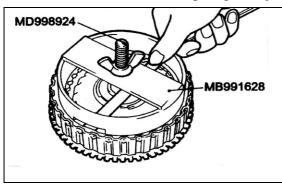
A-138 Standard value: 1.25-1.45mm 4 reverse and overdrive clutch disassembly and reassembly (see Fig.11A-139)
